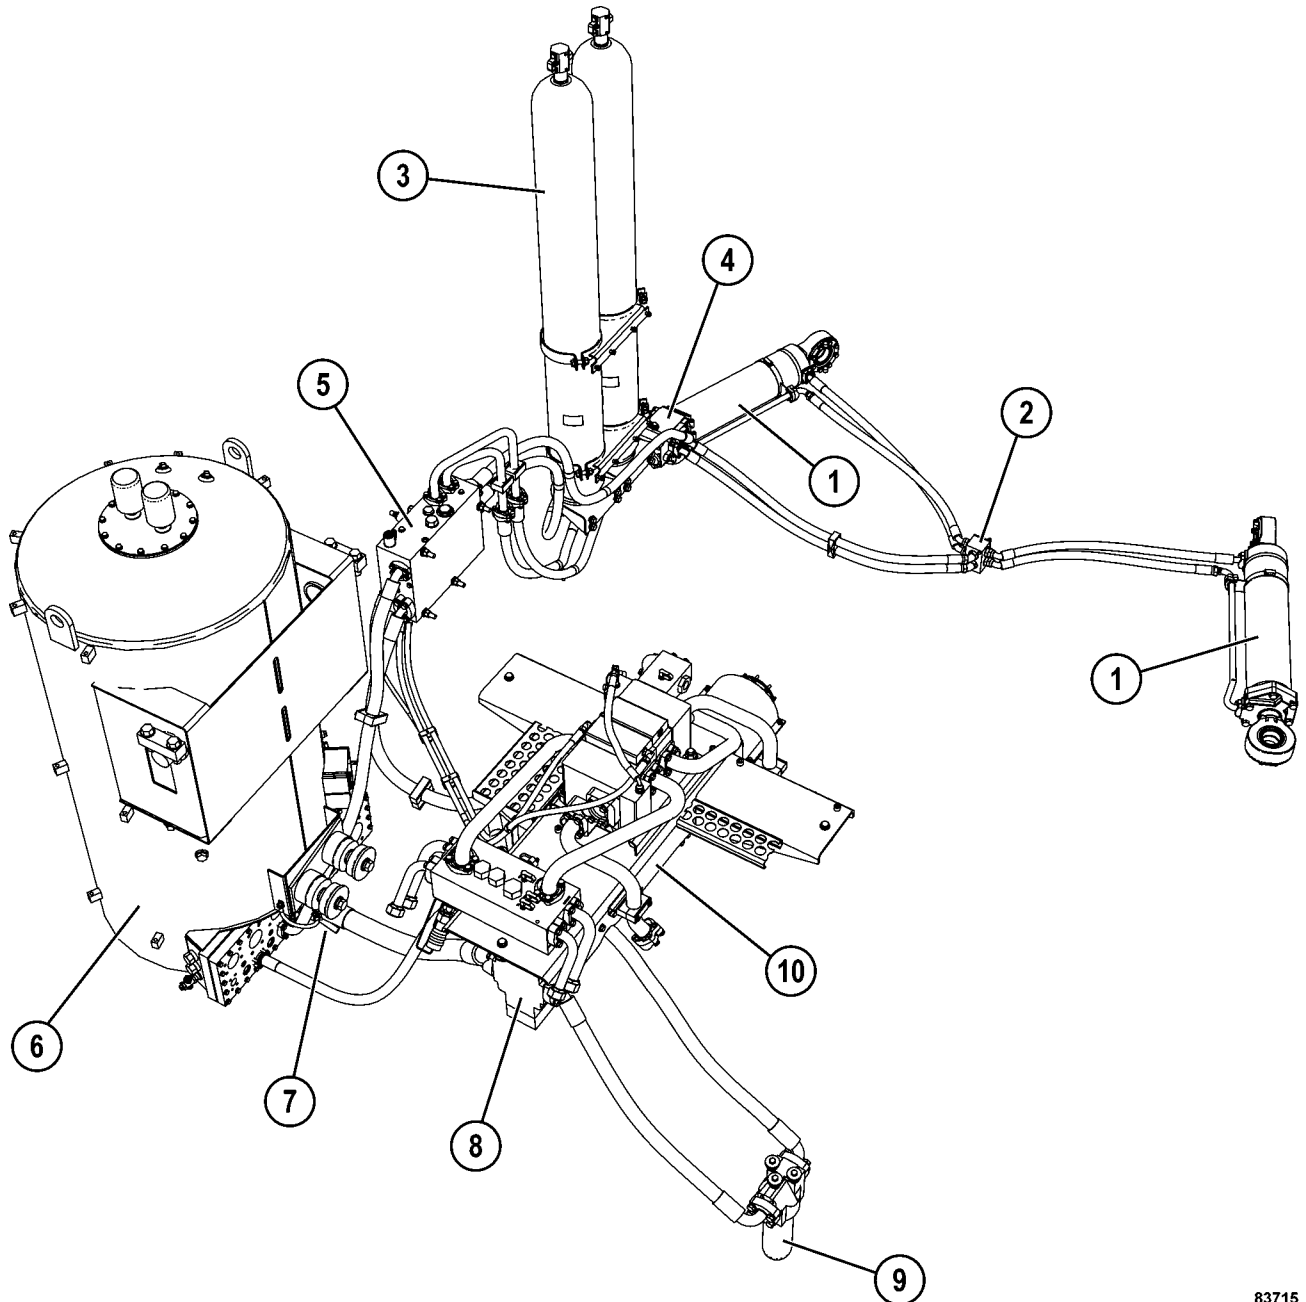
STEERING SYSTEM COMPONENTS
